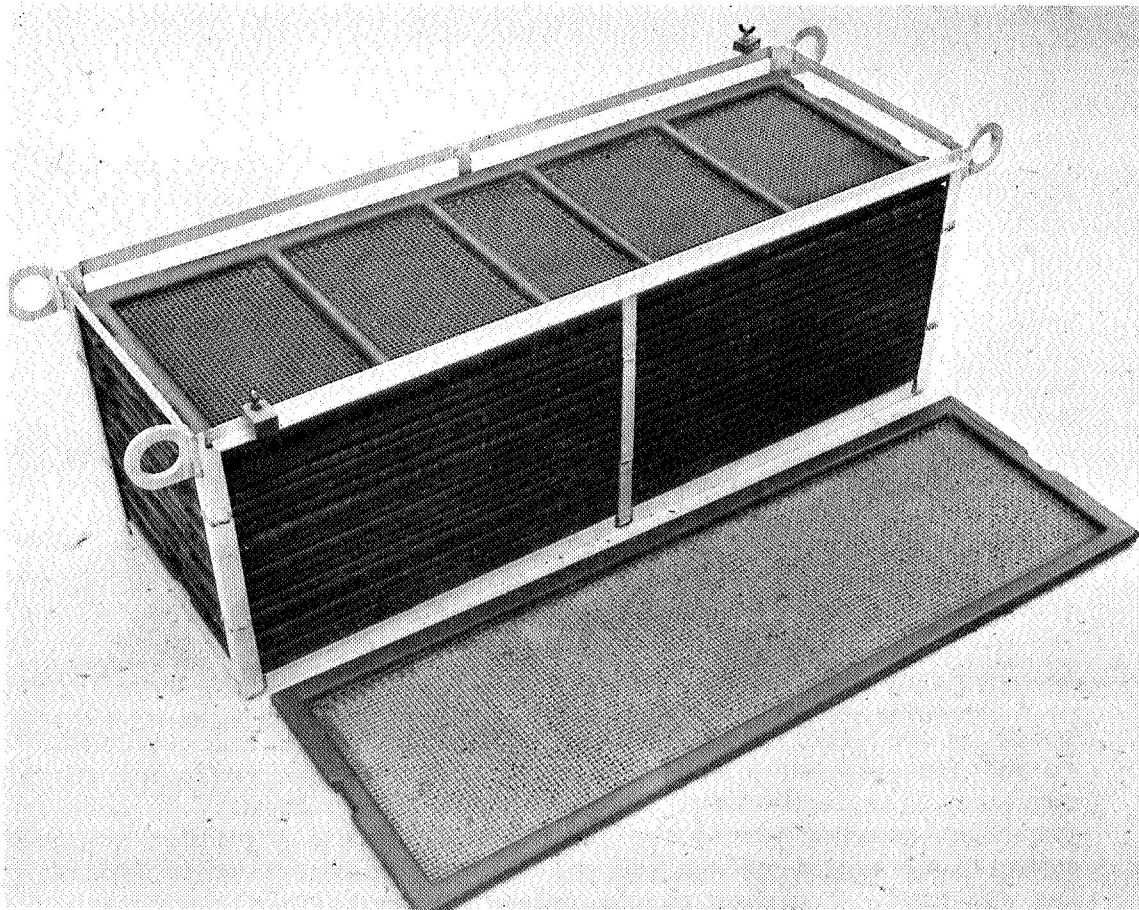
12x40-in. Cleaning and Handling Fixture
